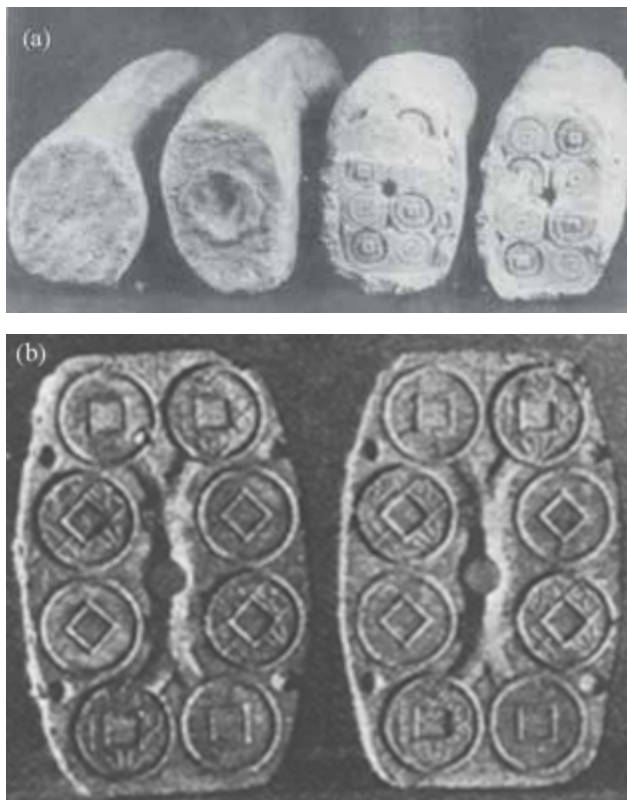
(a) casting molds (b) pieces of mold unearthed from a kiln in Xi'an, Shaanxi province, China in 1958. AD 8–23
